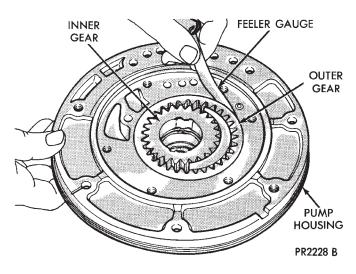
Measuring Pump Clearance (Gear to Pocket)
